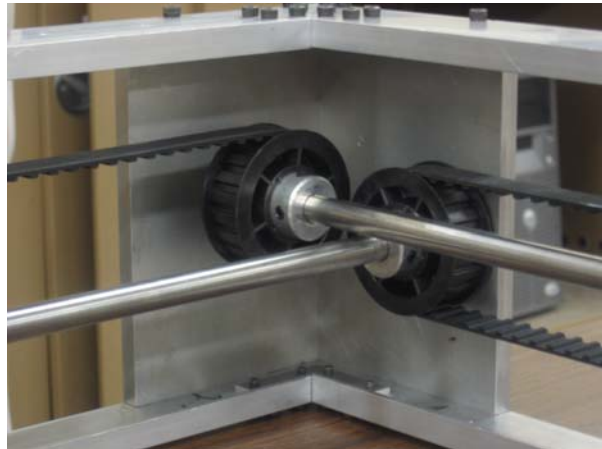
Low Profile Rails, Pillow Block, & Crossbar Housing Assembly
